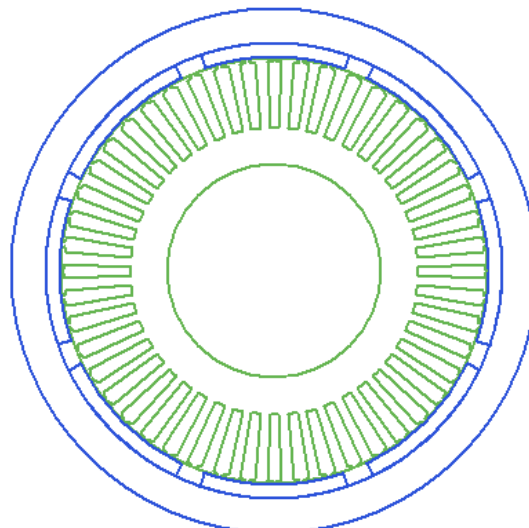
2D view of the surface mounted PMSM with outer rotor
